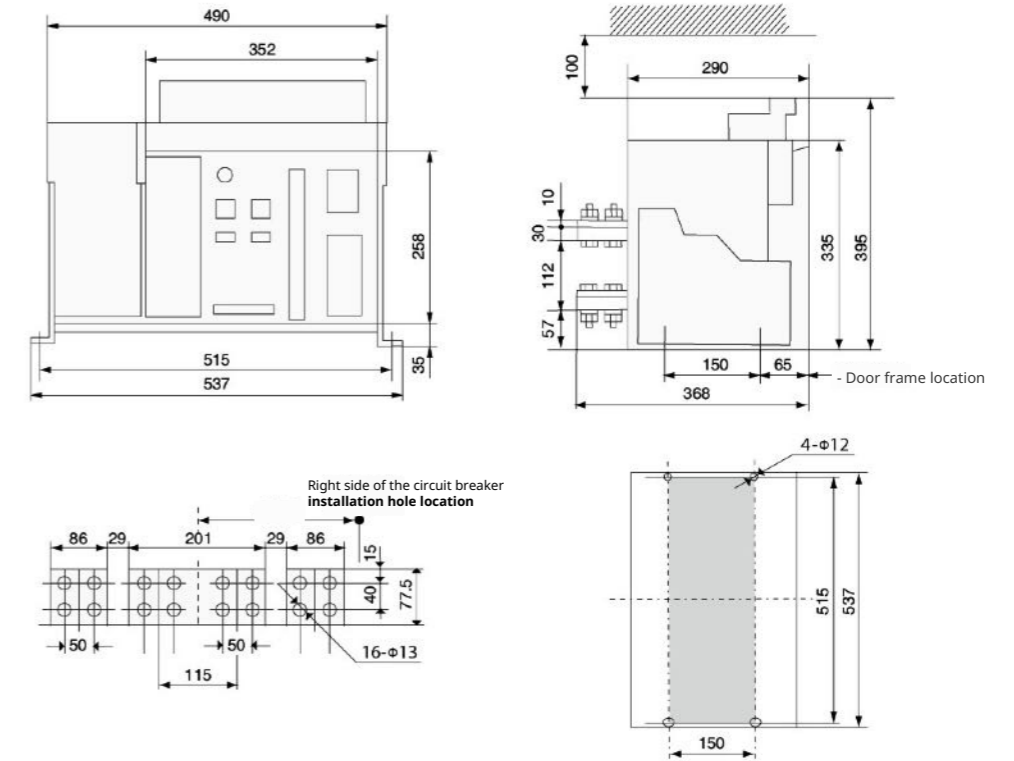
Fixed SDW1-4000 circuit breaker ( $I_n = 4000A$ , three-pole) dimensional drawing
